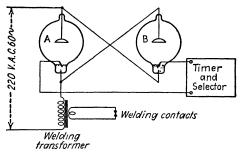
Welding circuit using igniter-type tubes.
